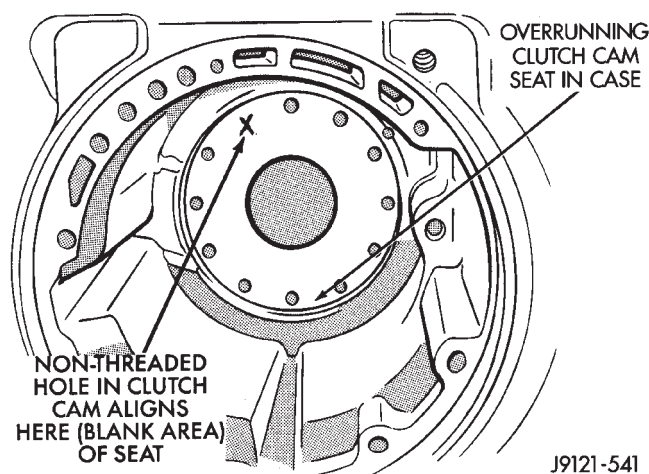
Location Of Blank Area In Clutch Cam Bolt Circle
